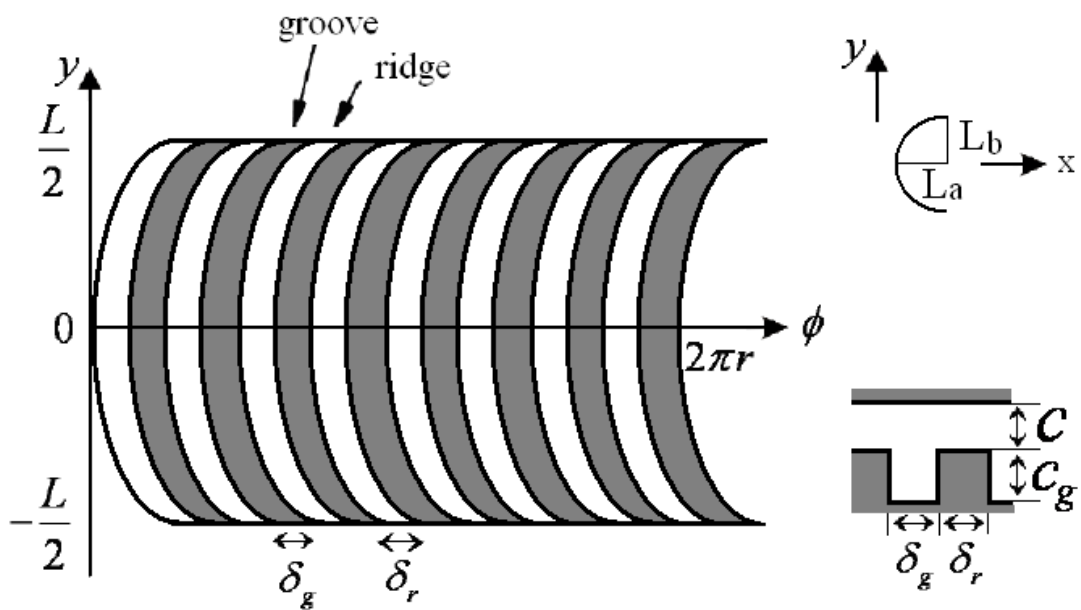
Parameters of the EGJB (The grooves can be engraved on either journal or bearing surface.)
